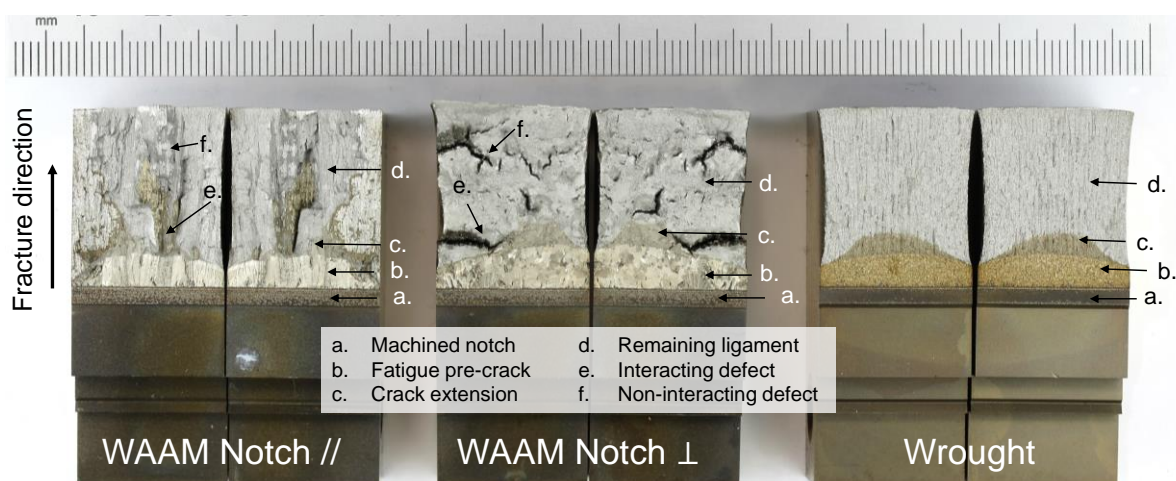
Fracture surfaces of WAAM and wrought C(T) specimens. Bronze colour indicates exposed surfaces during heat-tinting (i.e. fatigue pre-crack, crack extension and defects).
